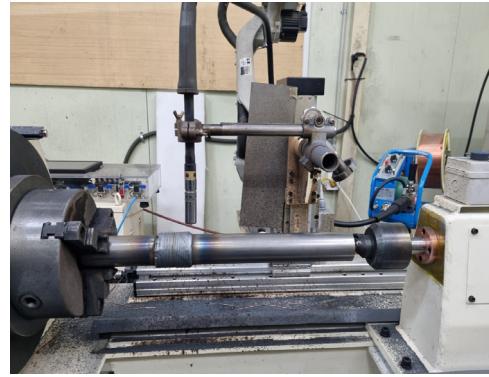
Experimental setup of welding for the wear resistance of contact tip
